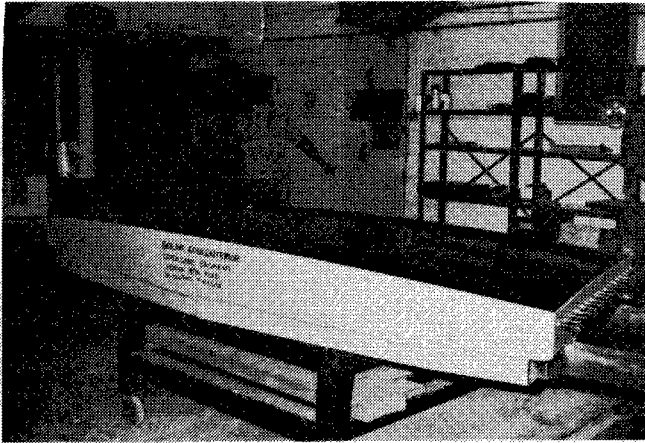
BOTTOM HALF OF OUTER PANEL MOLD
